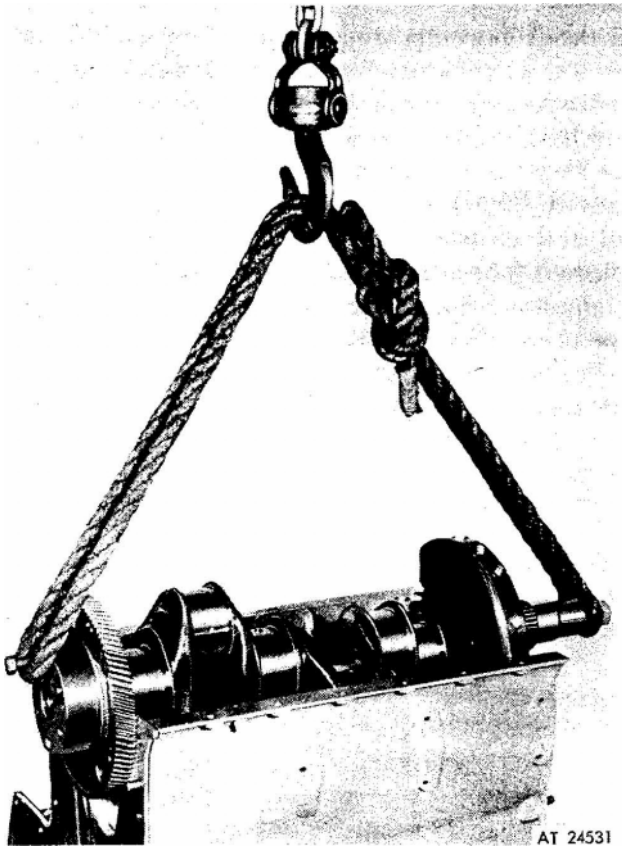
Lifting or lowering crankshaft from into cylinder block.
